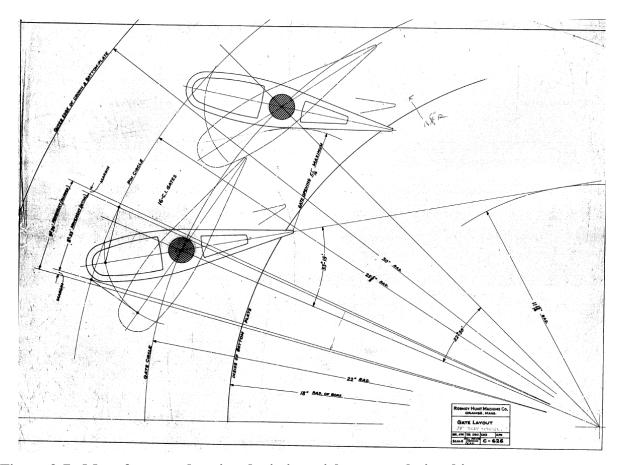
Manufacturer drawing depicting wicket gate relationship.
